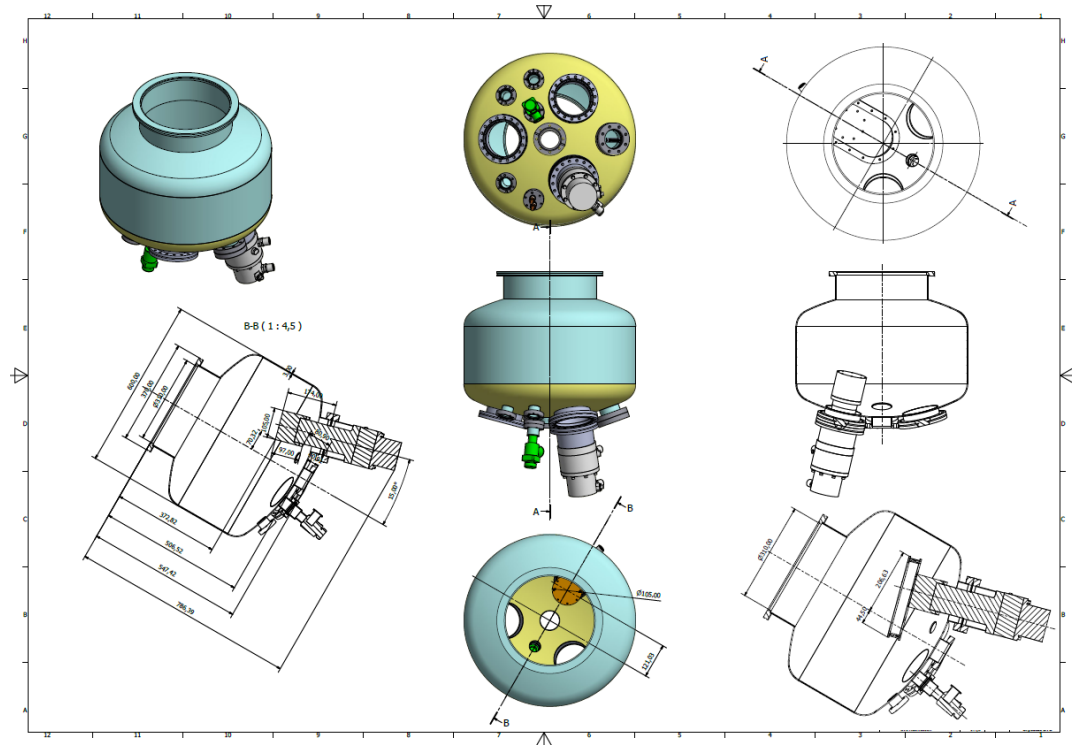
Illustration of cryostat and coldhead with the race track coil former mounted on top of the coldhead on the right hand side. The coldhead is a CH-110 connected to a F-70 helium compressor. The cryostat is mounted in a frame allowing the race track coil former to be inserted through the large flange opening. The coil is connected to current leads going through the cryostat and to an Agilent 6681 power supply. Voltage measurements are done by a Agilent 34420A nano-voltmeter connected to the coil using a separate vacuum feed through also holding the connection to thermometers for measuring the coil temperature.
